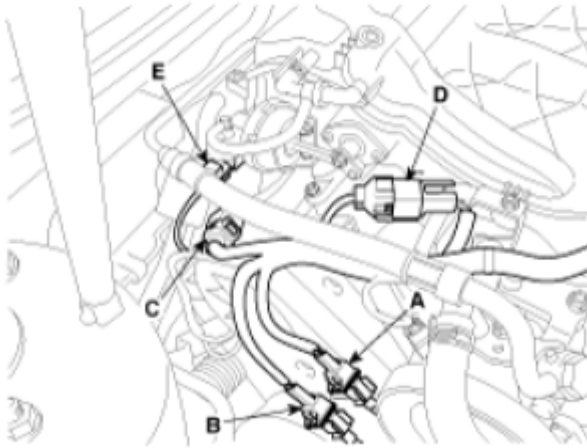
Identifying No. 1/No. 2 Knock Sensor Connectors, Injector Connector And Ignition Coil Harness
